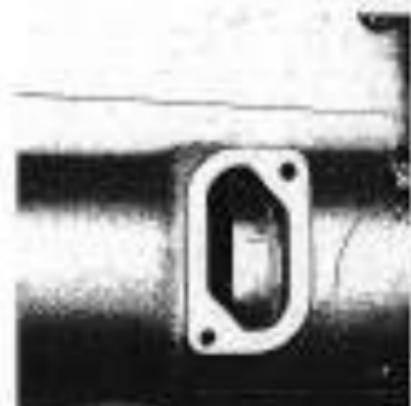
Lever and slot mounted on pump impeller, aligned with the slot.
